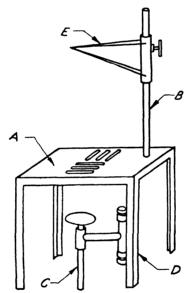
A universal welding stand for general welding and for practice welding: A. Cast iron top with slots, B. Iron pipe threaded into cast iron top, C. Fabricated stool, D. Angle iron bench, E. Adjustable holder for vertical, horizontal, and overhead welding
